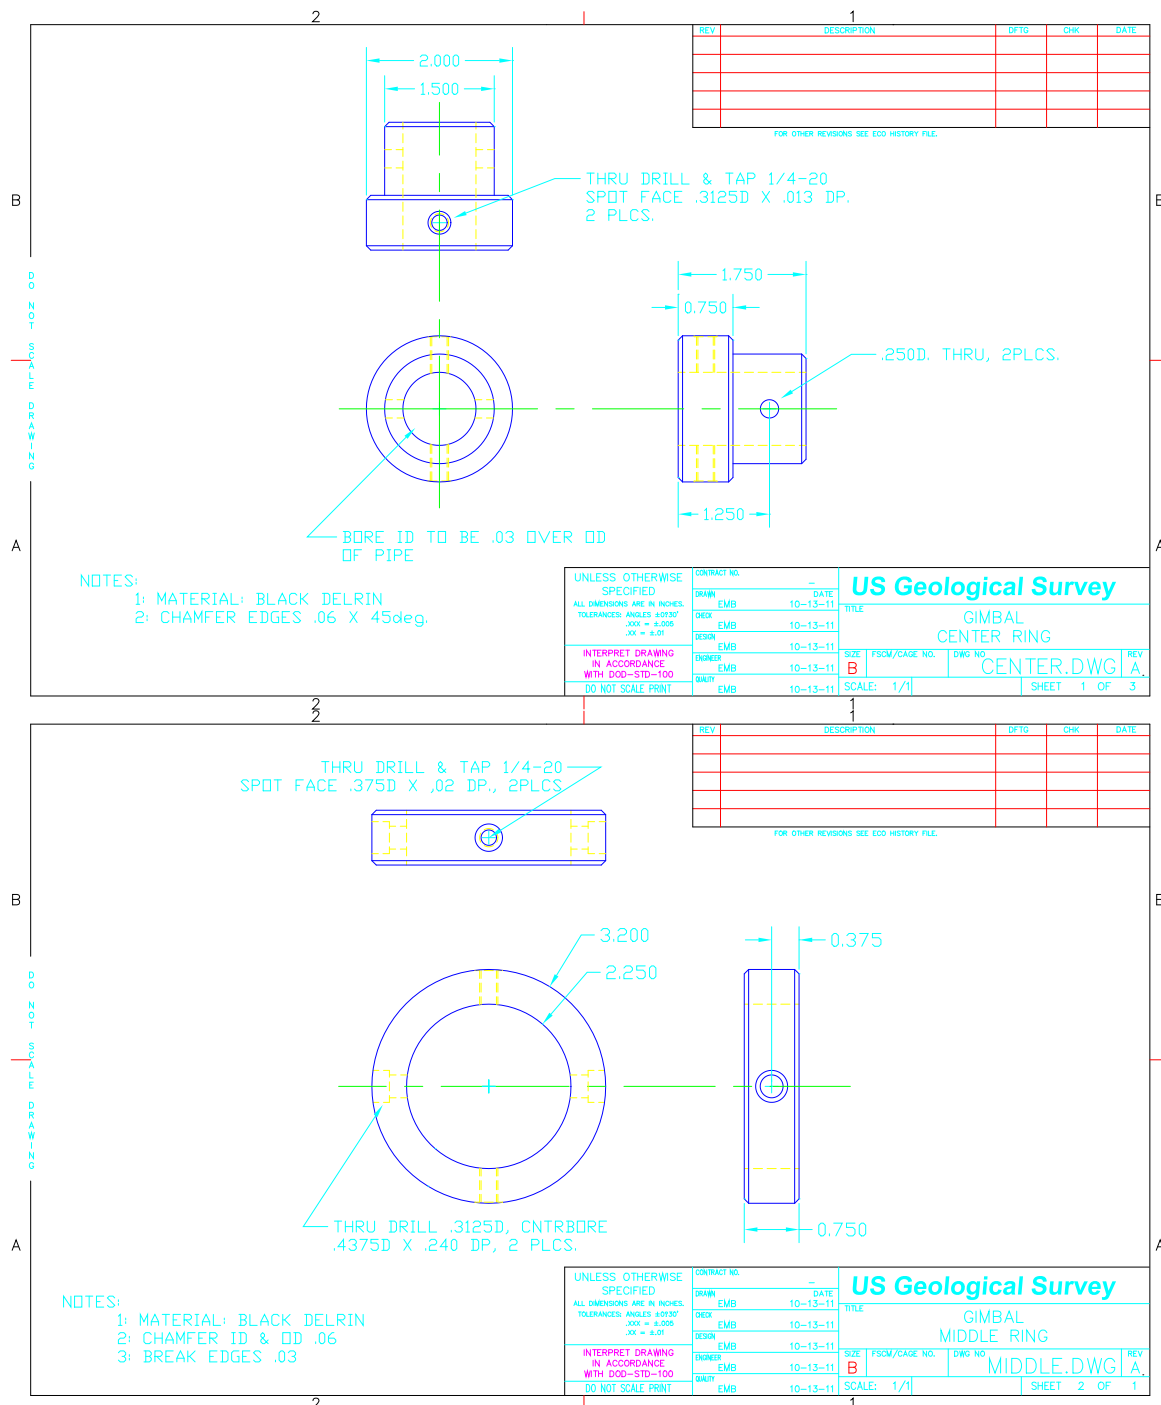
Design drawings for the gimbal: center and middle pieces. Design and construction by E. Bergeron, USGS Woods Hole.
